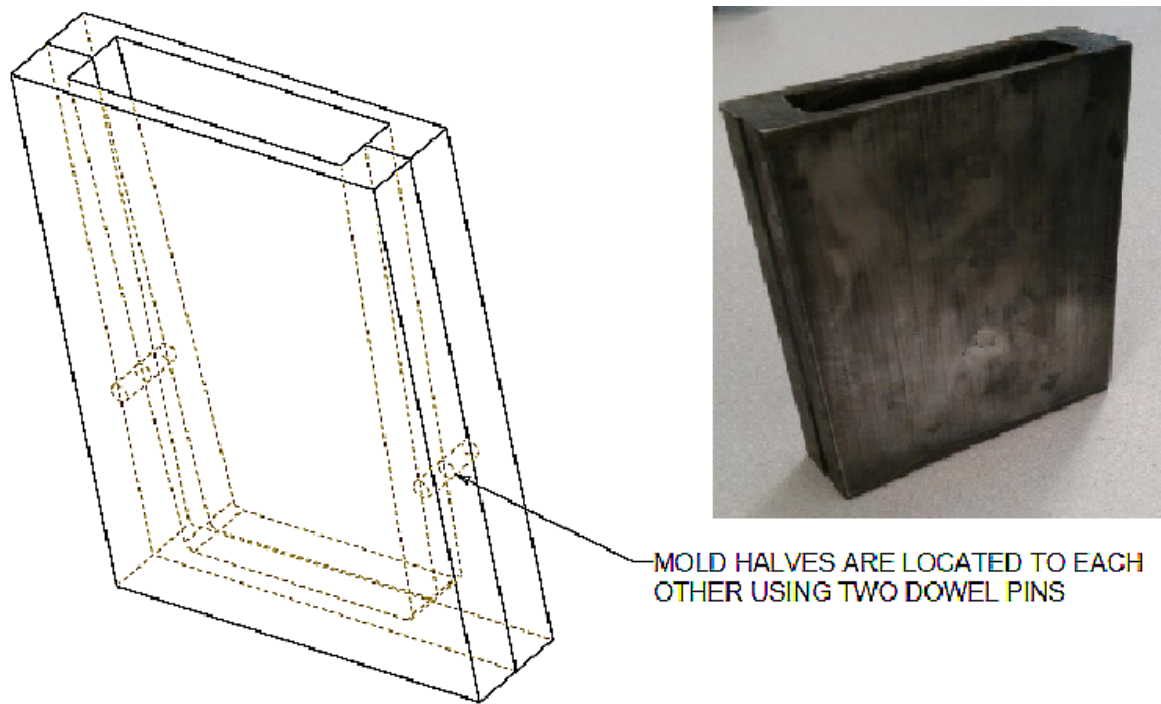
Mold machined from mild steel. The two halves of the mold were located to each other using dowel pins.
